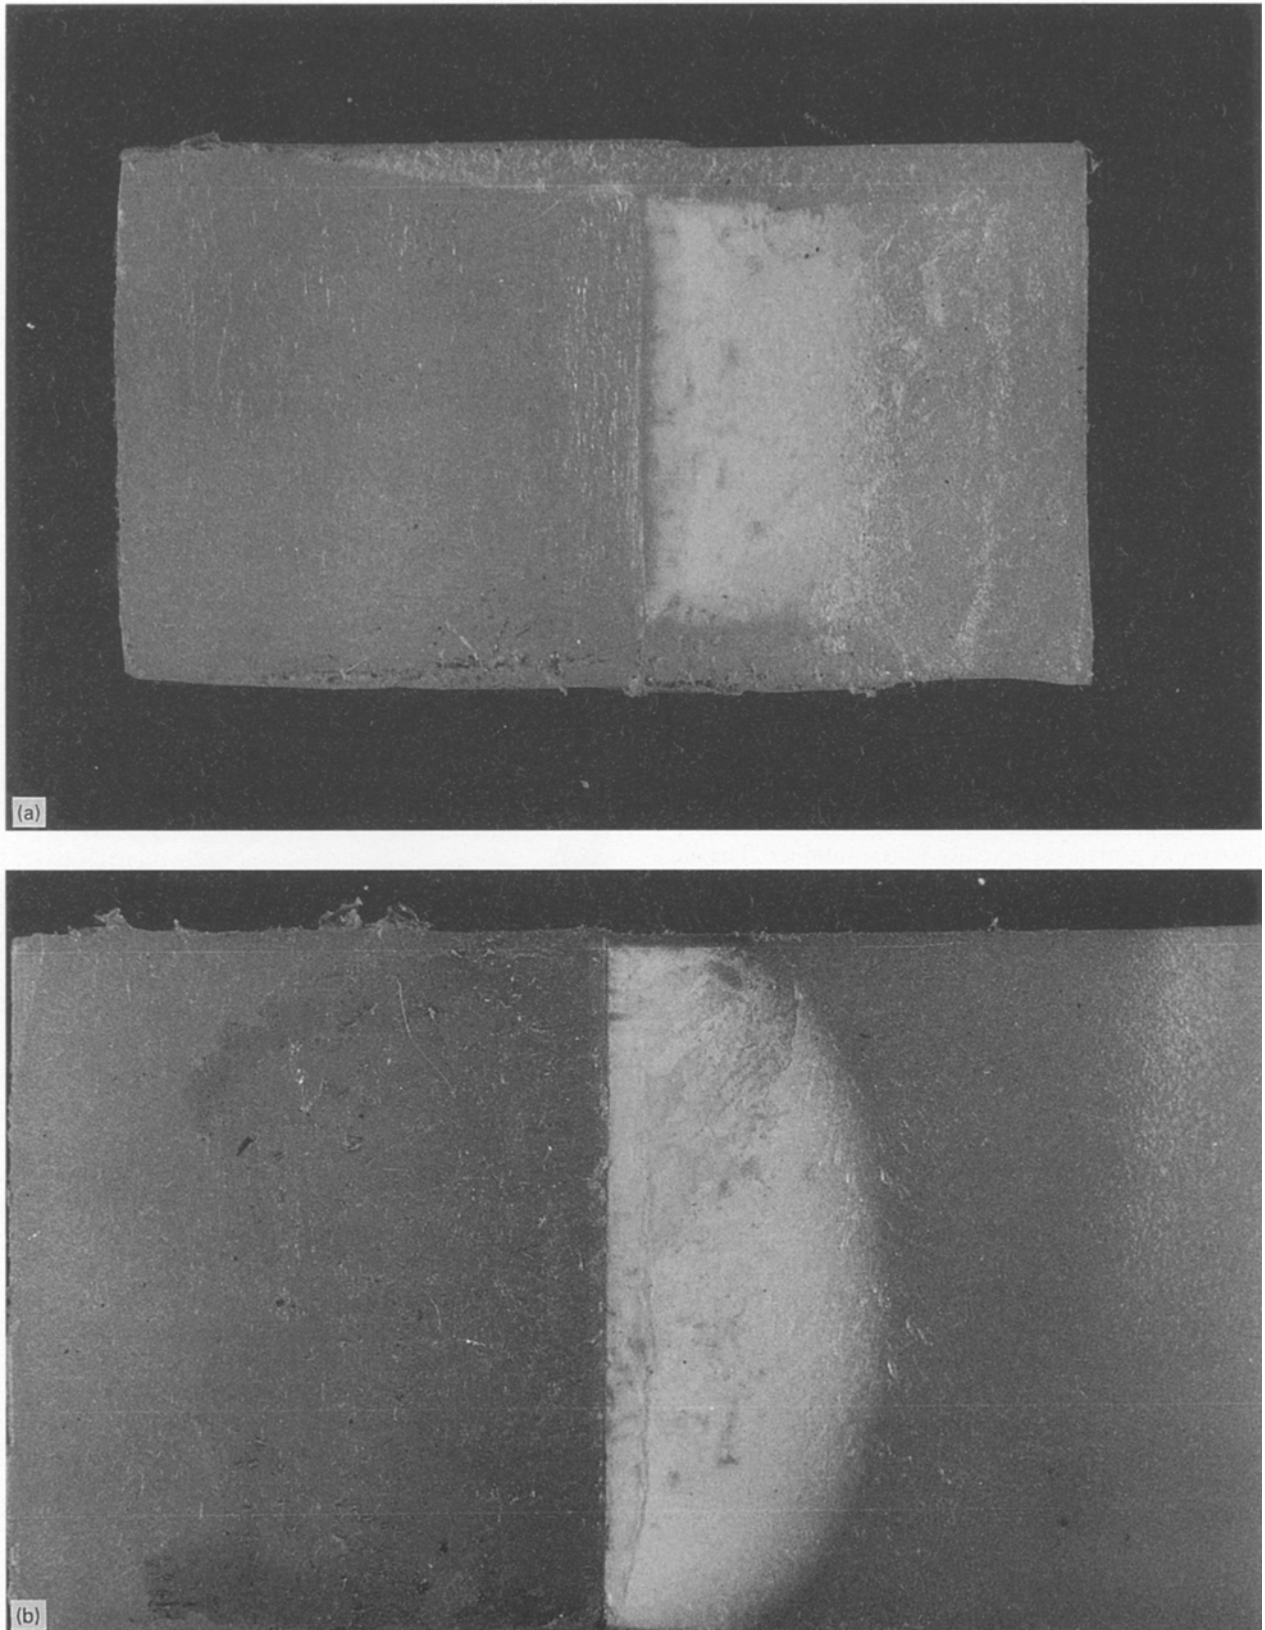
Photographs of the fractured surfaces of (a) a conventional specimen, and (b) a side-grooved specimen.
